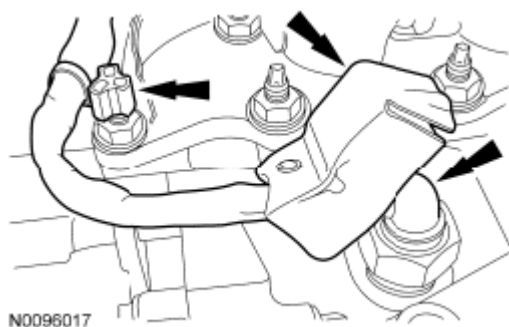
Locating Block Heater Wiring Harness Retainers & Block Heater Wiring Harness
